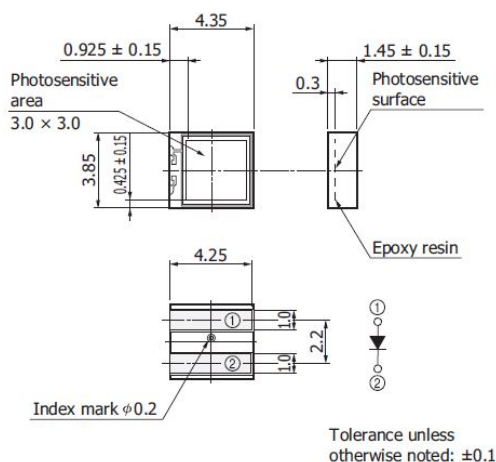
Hamamatsu S12572 MPPC surface mount package dimensions.
